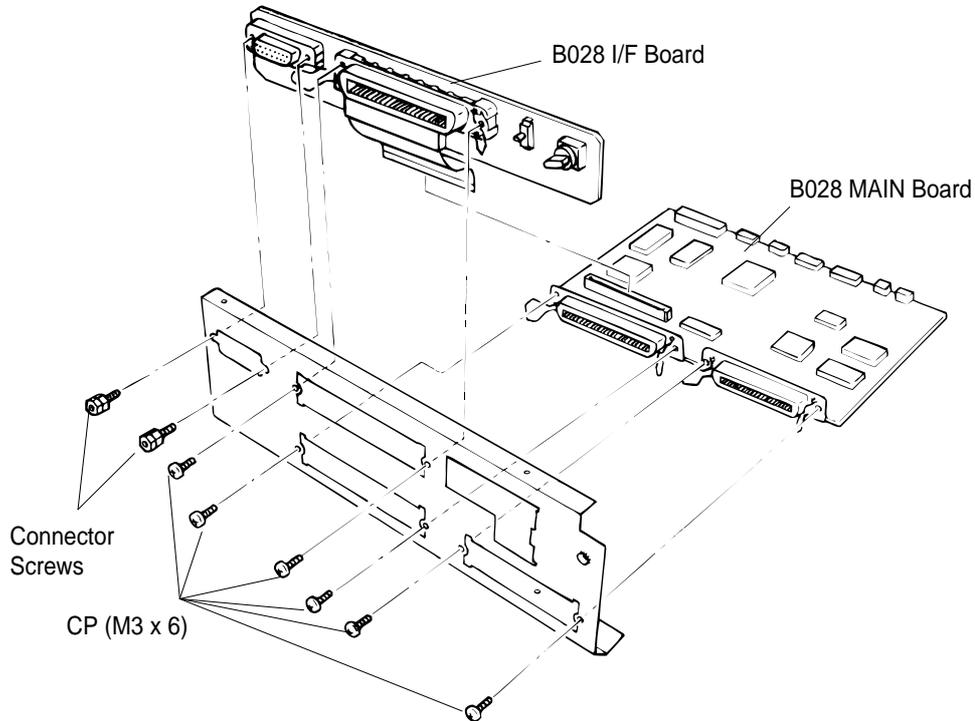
Removing the B028 MAIN and B028 I/F Board
